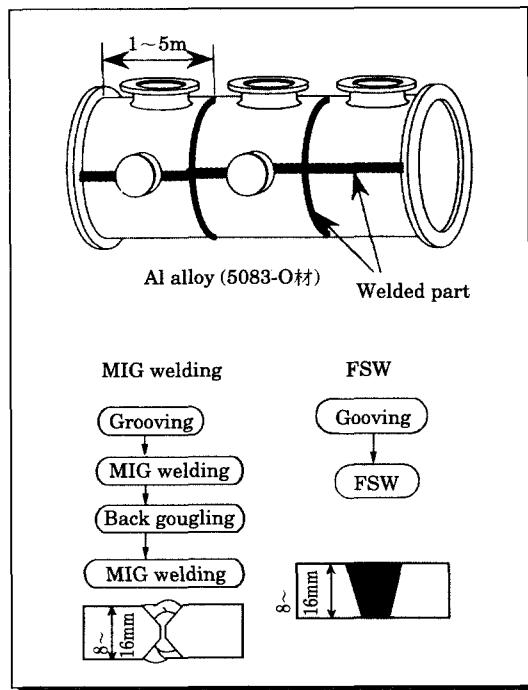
Application of FSW to Cylindrical Tube and Comparison of Manufacturing Process of MIG welding and FSW
